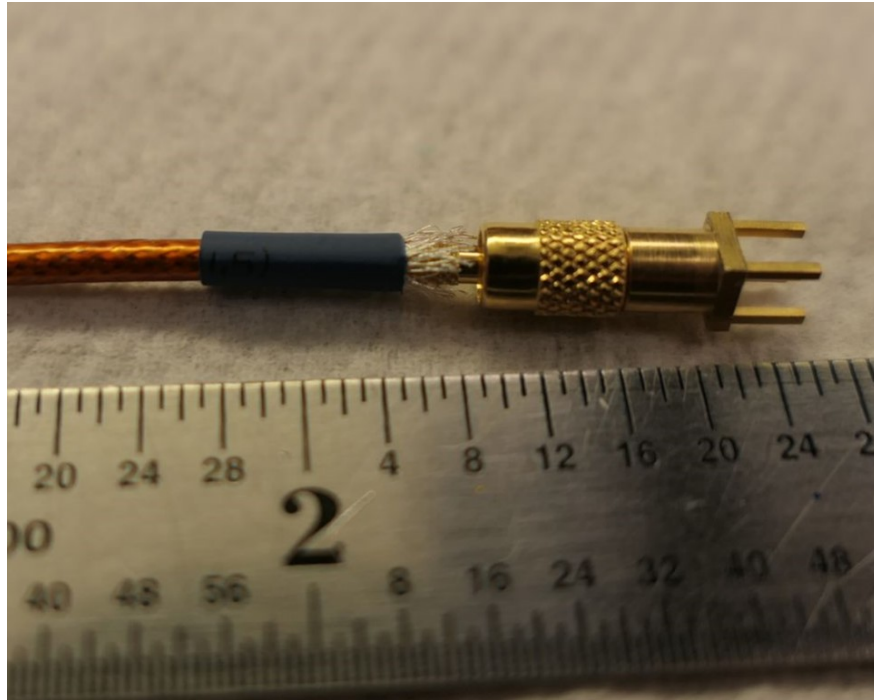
A coaxial cable with a layer of heatshrink partially covering the outer conductor and knurled portion of the MMCX plug. The plug is also connected to a jack in order to check for continuity. Not shown here is a crimp sleeve to the left of the heatshrink, which is pushed over the heatshrink tube, pushing the heatshrink to the right in the process. The layer of heatshrink prevents the edge of the crimp sleeve from biting into cable and severing the insulation layers. It also helps immobilize and protect the outer conductor wires which have a tendency to sever after being crimped.
